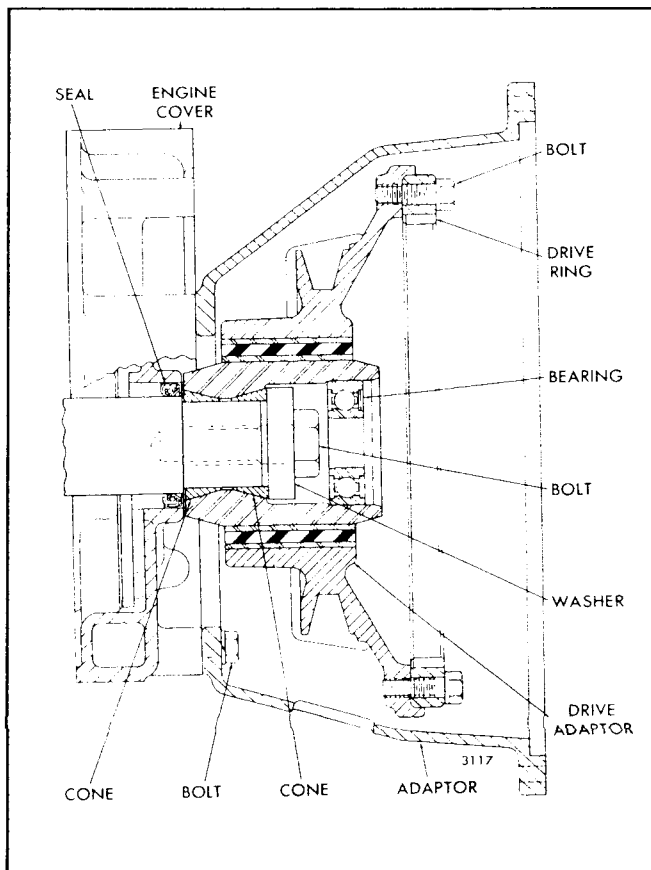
Front Power Take-Off Adaptor and Drive Mechanism
